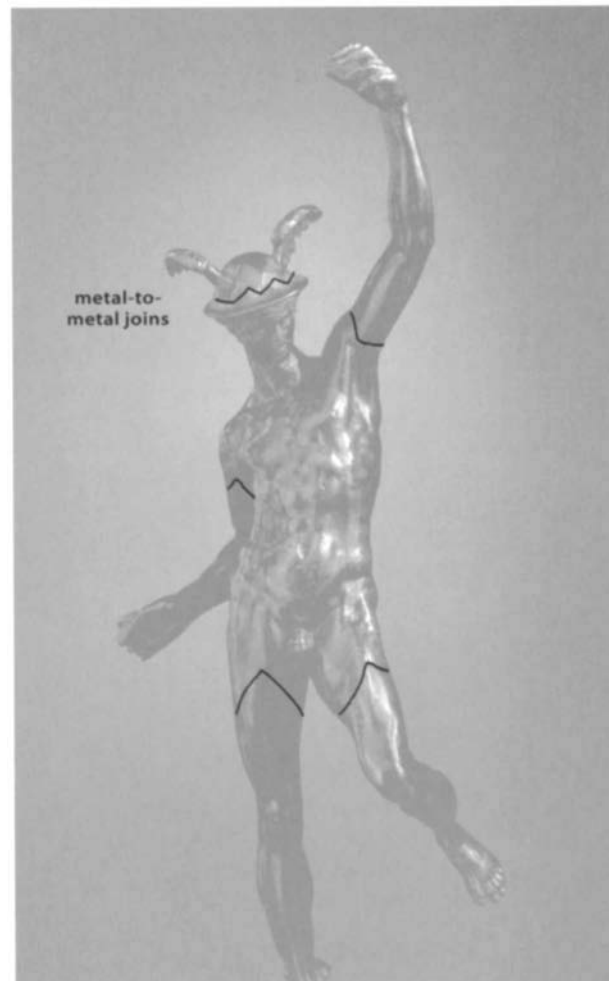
Summary of the zigzag metal-to-metal joints.
